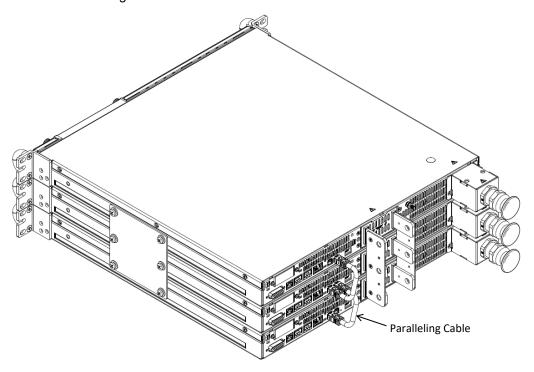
Three 60V-100V Units Paralleling Cable Connection
